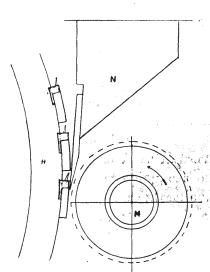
Section of Sykes' Burring Machine, showing relation of the Cylinder Blades to the Comb.
